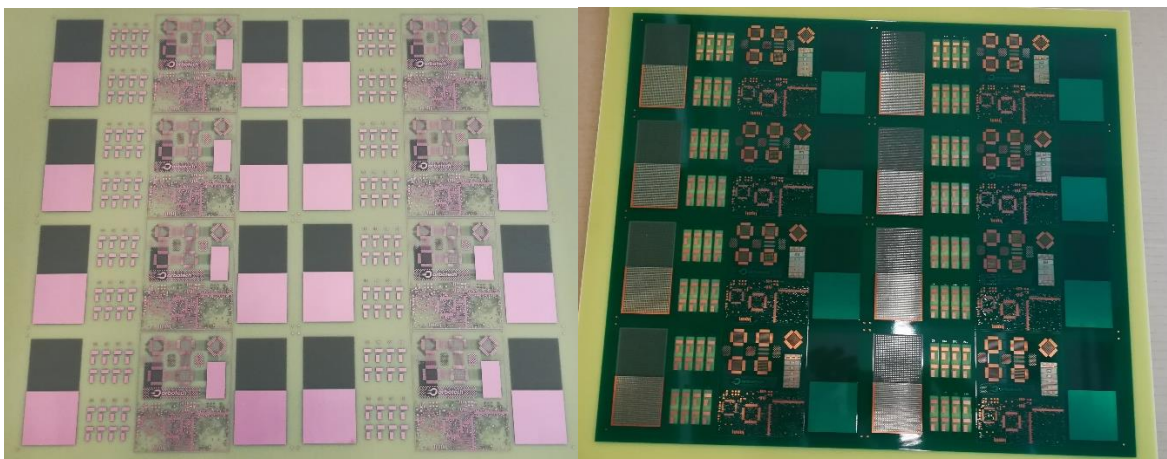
Image of Test Vehicle Design for Testing Direct Jetting of SM Before and After Printing.
